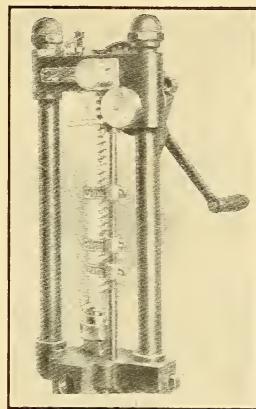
In this type the piston stops are split vertically and may be made secure against alteration by passing a seal through one end of the screws which hold together the two halves of the stop
